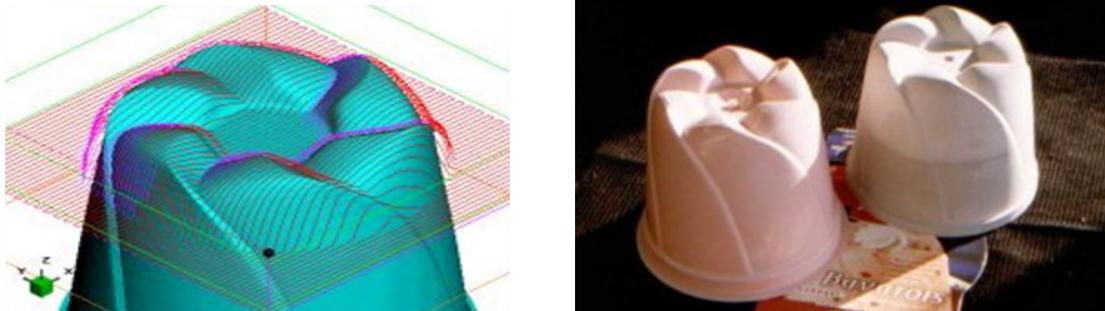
Final product manufactured by using the milling strategy designed in SurfCAM system – raster toolpath copying the shape
